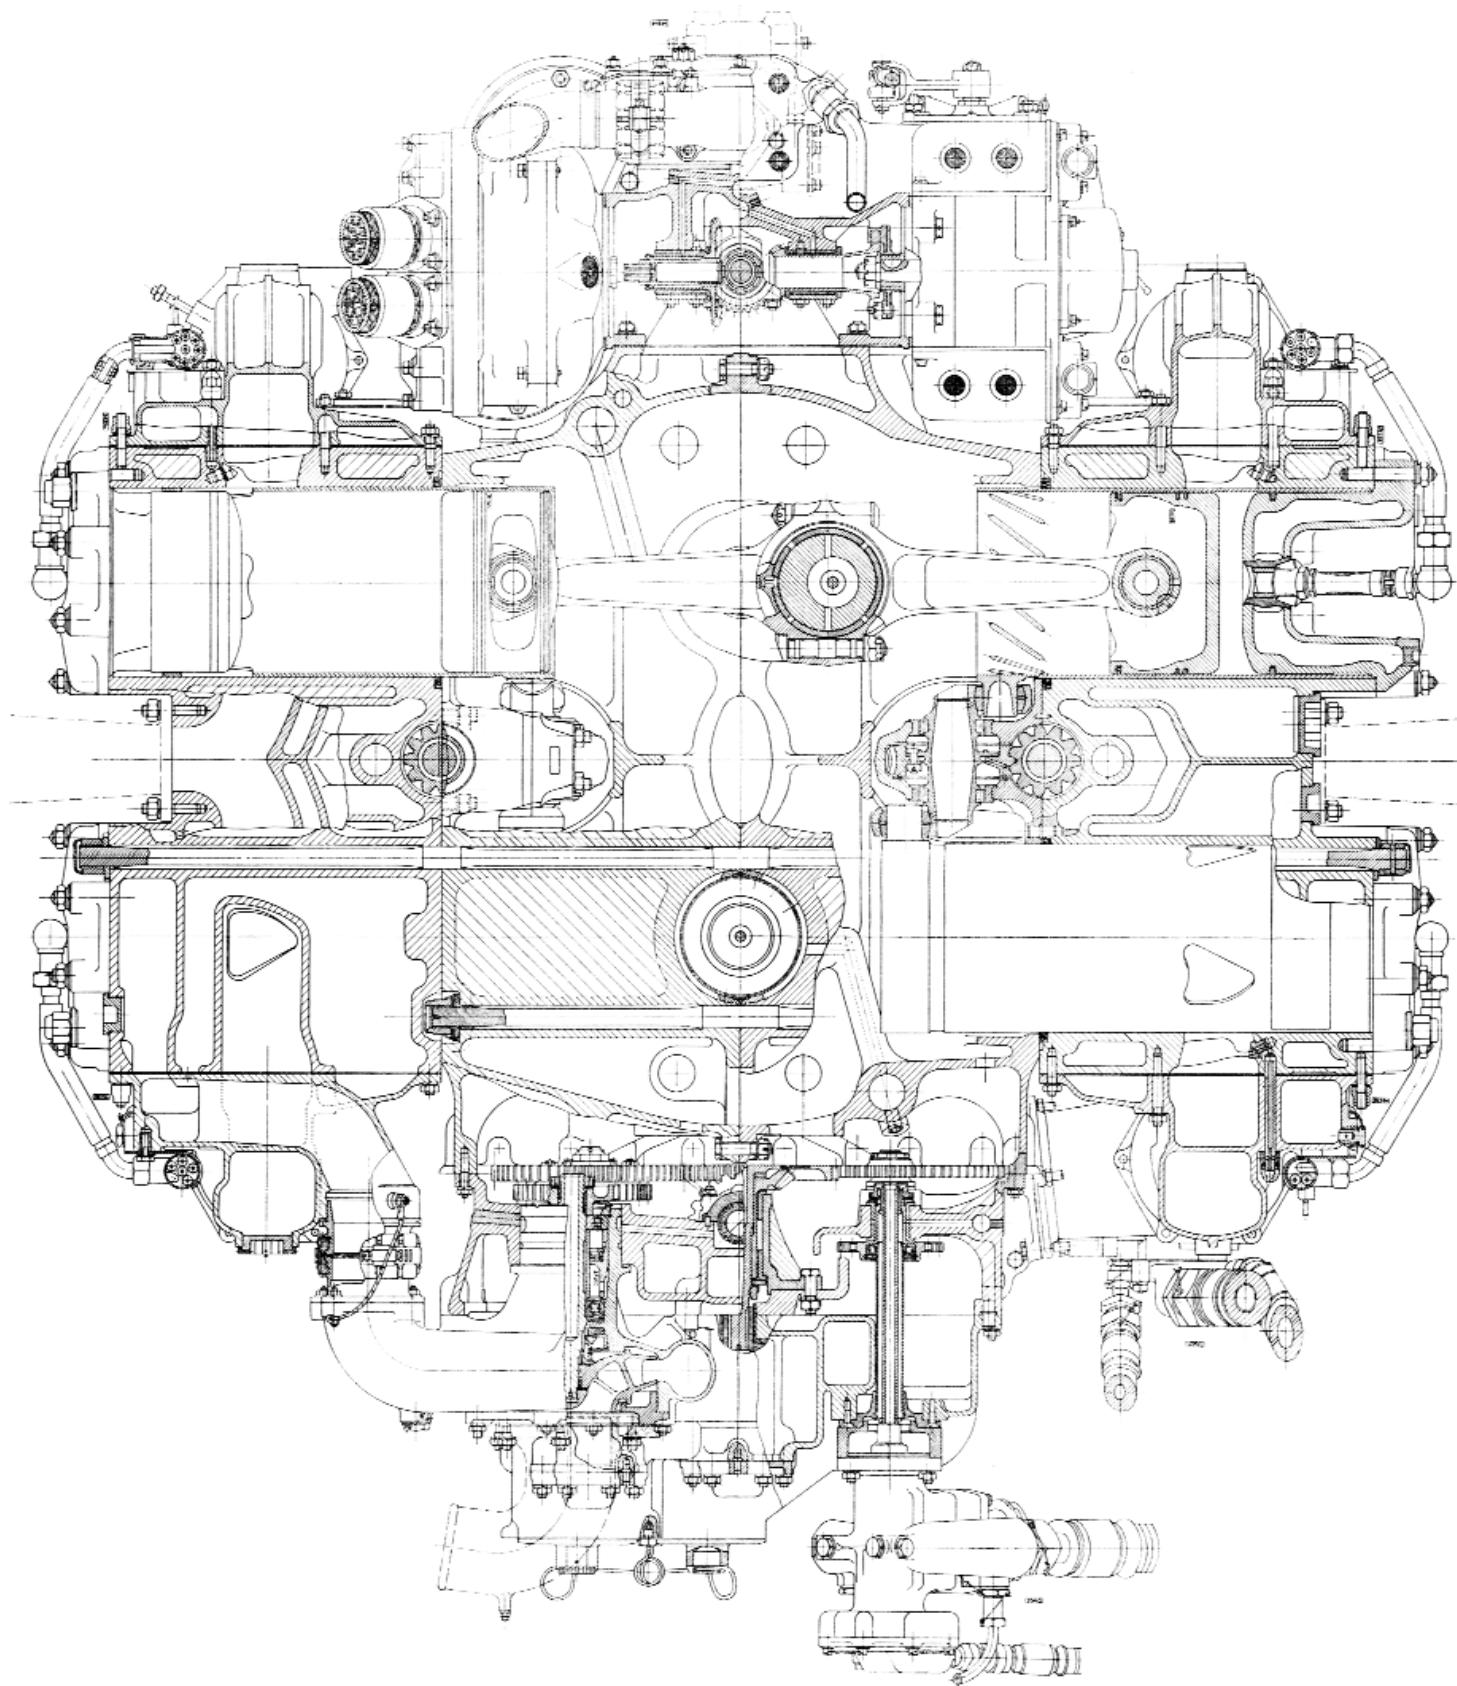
Cross Section of the Napier Sabre Engine (Ricardo, [1])
